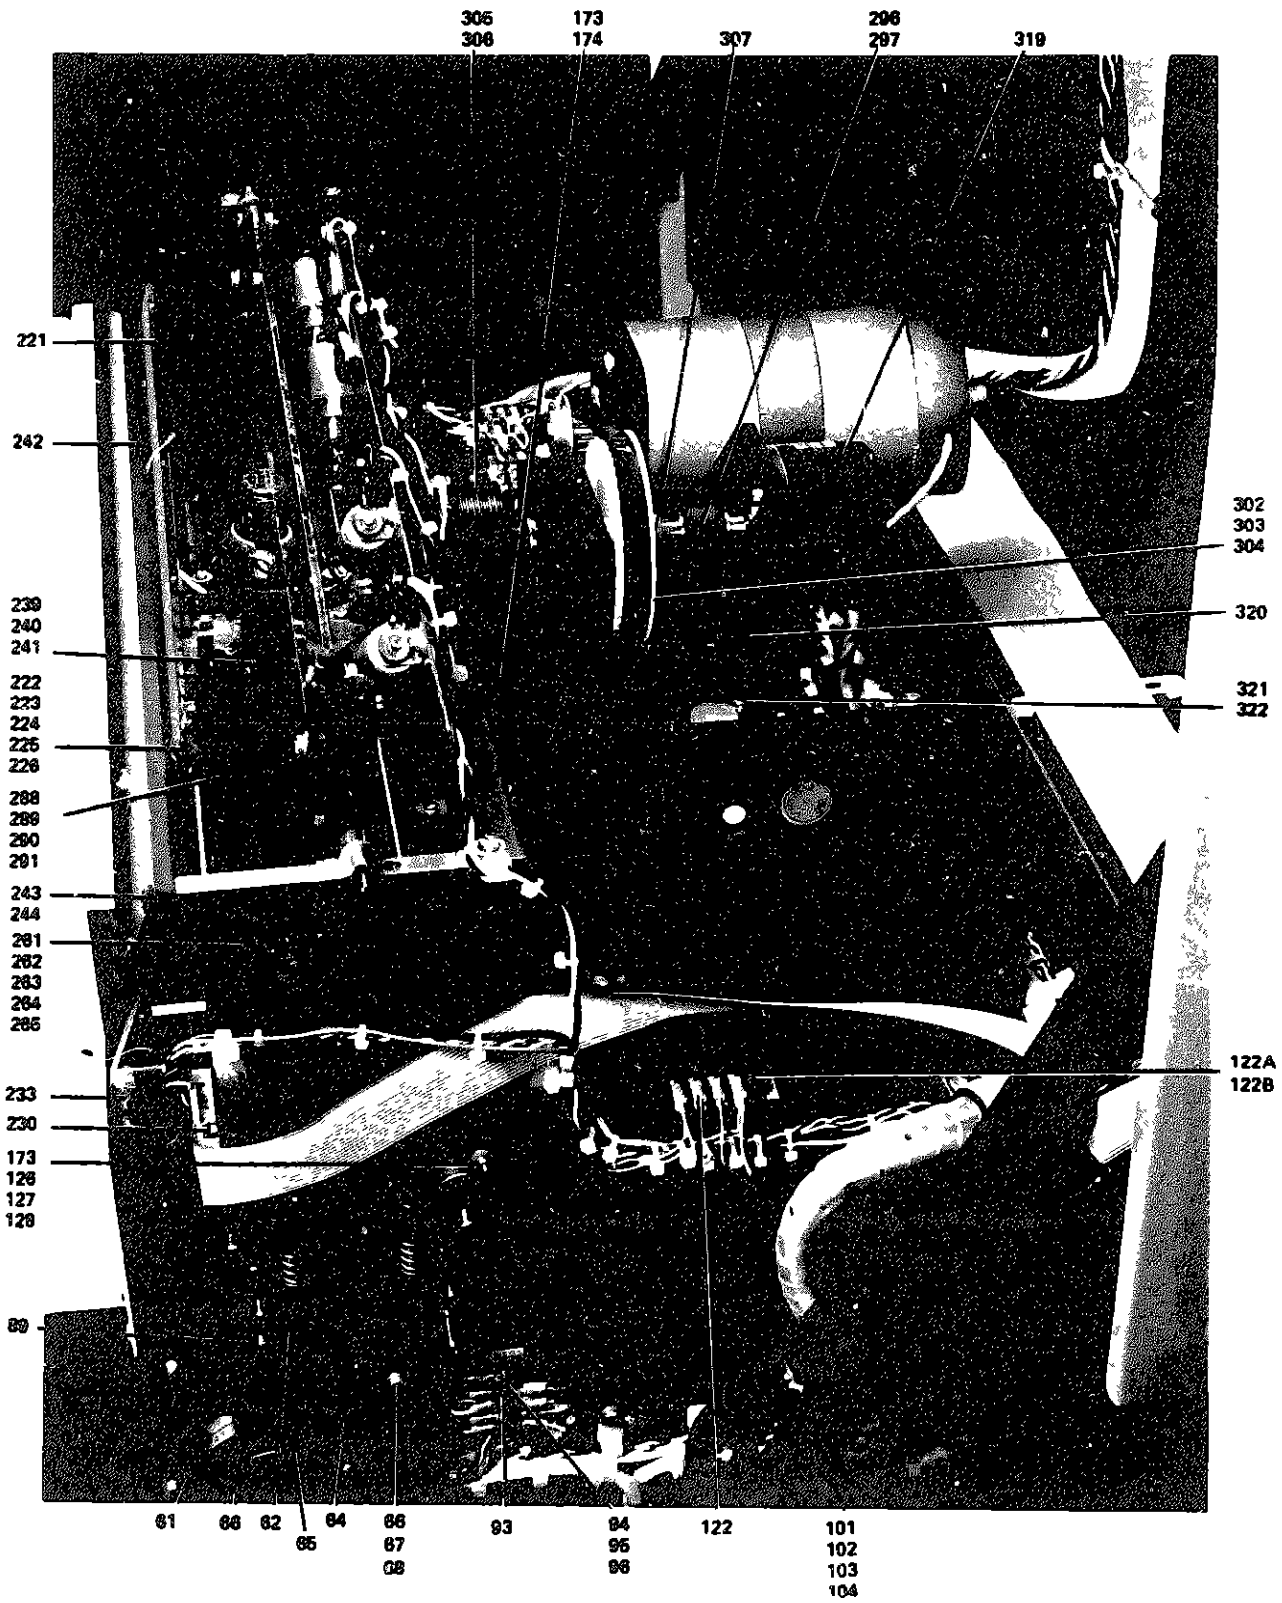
Head and Paper Drive Assembly Right Side (Sheet 8 of 8)
